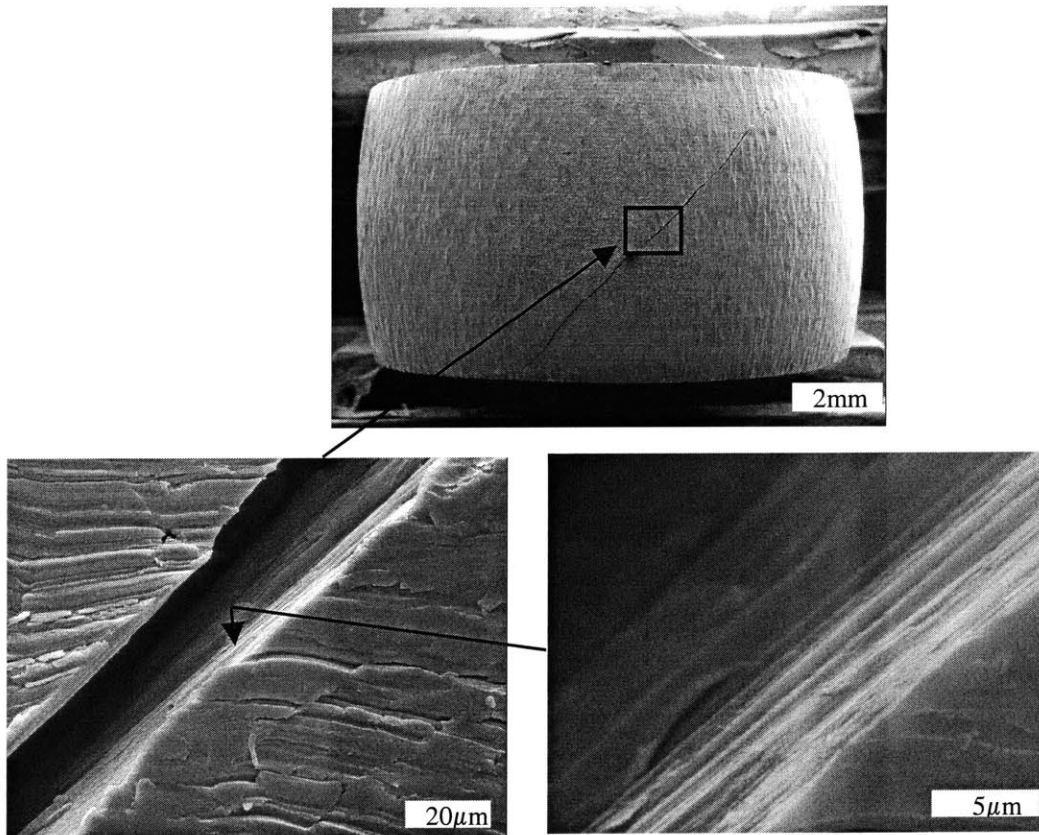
Fractograph showing flat fracture surface in the upsetting specimen
